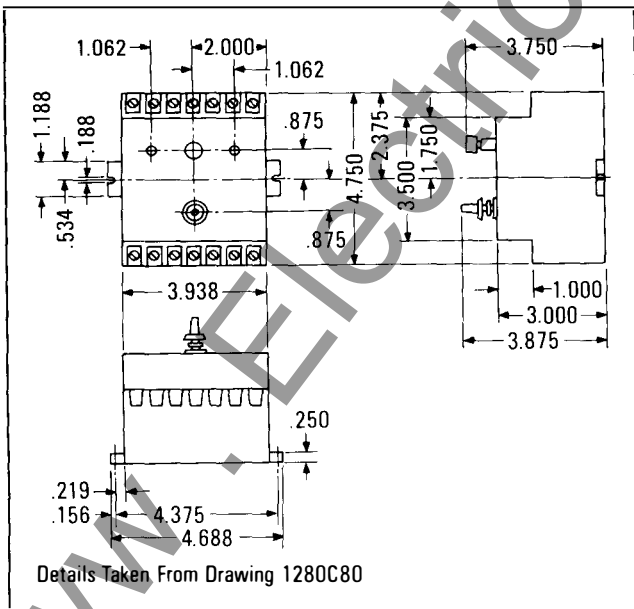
Outline of Time Delay UVR Device for Surface Mounting
